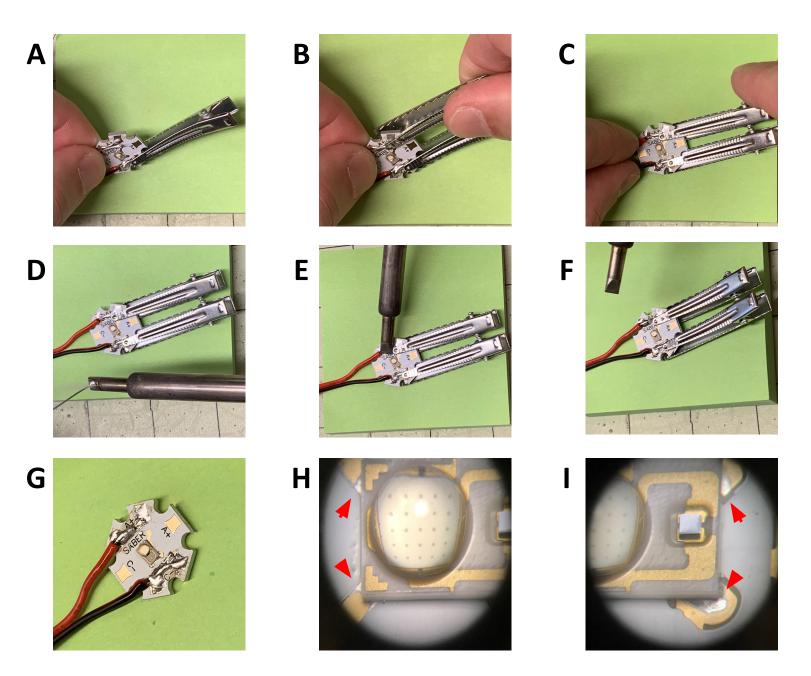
Soldering wires and LED onto the LED base Part 4. (A) The black wire still clipped to the contact by the hair clip. (B,C) Using a second hair clip, the red wire is held into place. Note that the red wire is soldered to the anode "A+". (D) Addition of a generous amount of solder to the the soldering tip. (E) The soldering tip pressing down on the wire, melting the solder on the LED base and the wire as well as the solder paste under the LED. (F) The hot LED base cooling after soldering. (G) The LED base with the wires and LED soldered on. (H,I) Red arrows point to soldering pads. After soldering, the solder appears metallic/shiny (Compared to grey before soldering (Figure S16D)).
